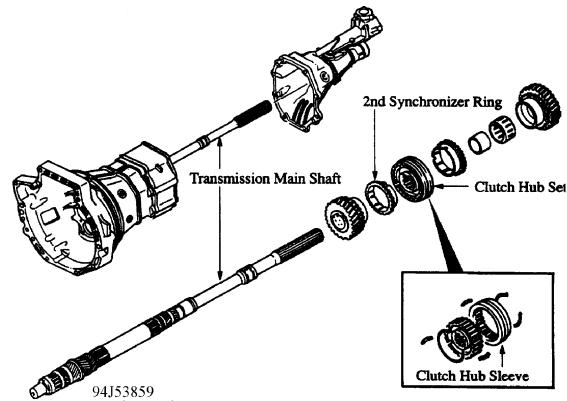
2nd Gear Synchronizer Ring and Assembly
